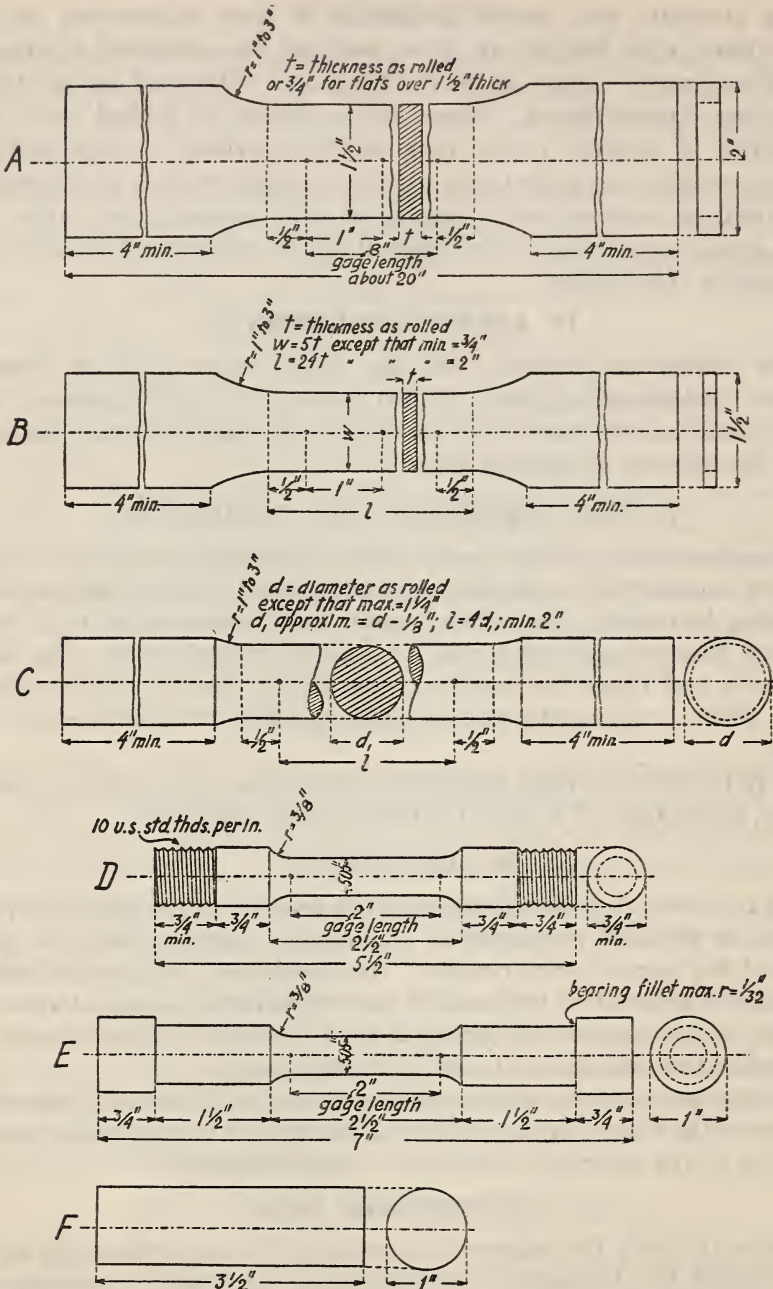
Standard specimens used and recommended by structural and engineering mechanics section, Bureau of Standards.
